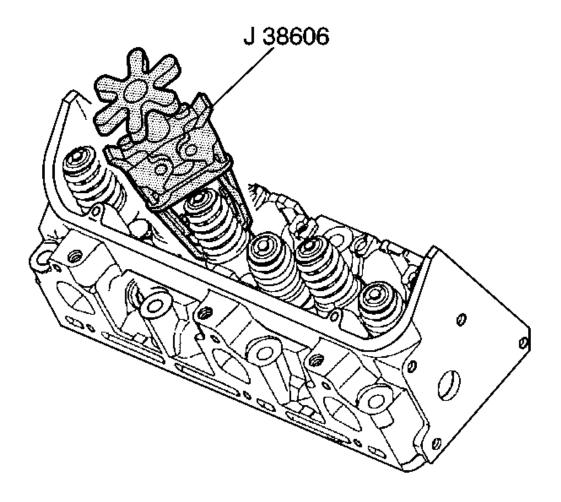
Compressing Valve Springs Courtesy of GENERAL MOTORS CORP.
